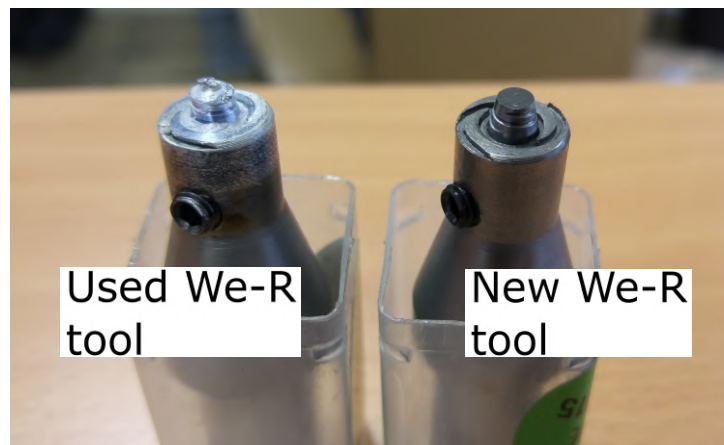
We-R tools used in the manufacturing of Al/Ti FSW joints. The left tool is slightly used and aluminium is stuck on the tool tip. By comparison of the two tools, slight wear is visible on the tool tip of the used one.
